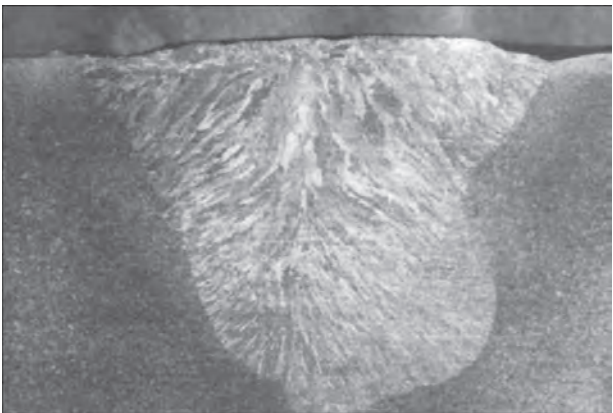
Macrostructure (x2.1) of welded joint of 15Kh1M1F steel
